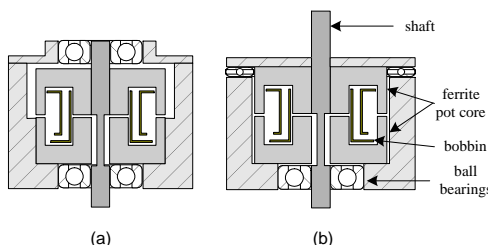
The mechanical layout of a rotating transformer (a) for radial loading of the shaft and (b) for axial loading.
